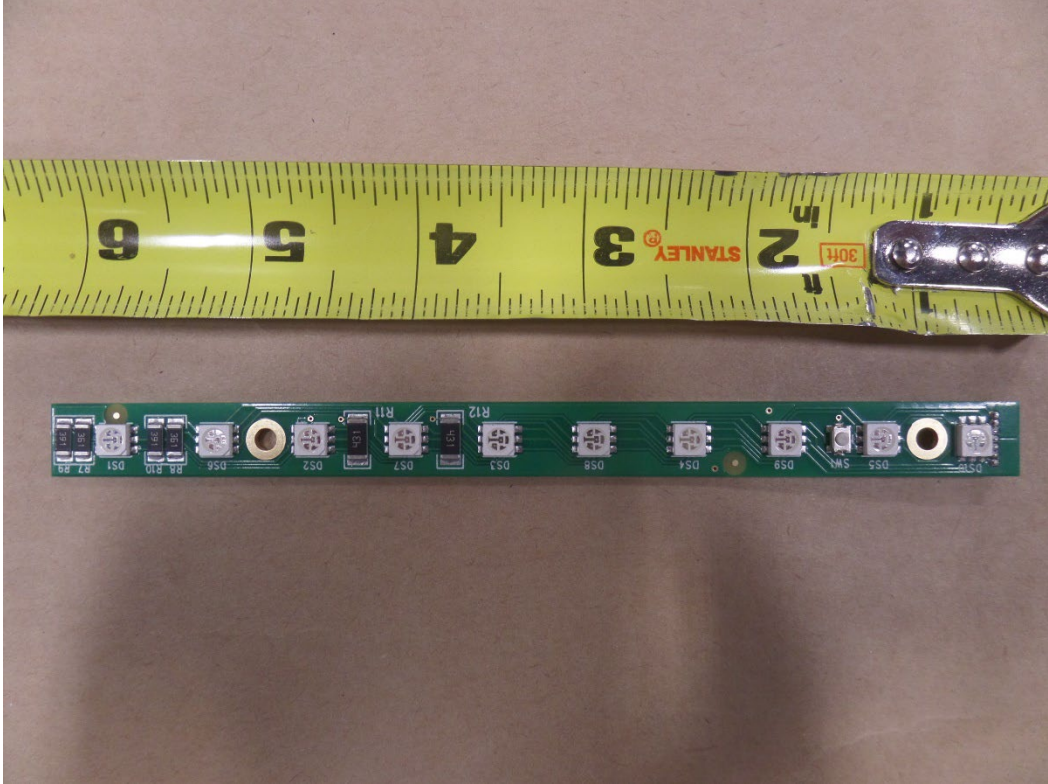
NP22 PRI/PAB/SAB RF ANT FRAME LED BOARD TOP SIDE
